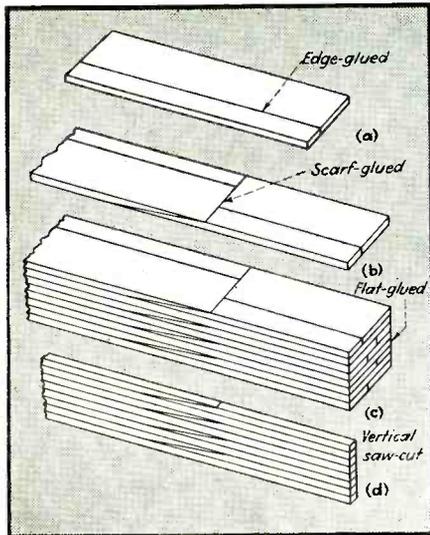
(above)—Steps in the construction of multi-laminar spar showing (a) narrow boards edge-glued to obtain 6-in. widths, (b) short boards scarf-glued to obtain 16½-ft length, (c) ¾ x 6-in. boards flat-glued to obtain 6 in. x 6 in. x 16½-in. block, (d) block sawed vertically to obtain edge-grain laminated spars ¾ in. x 6 in. x 16½ ft
